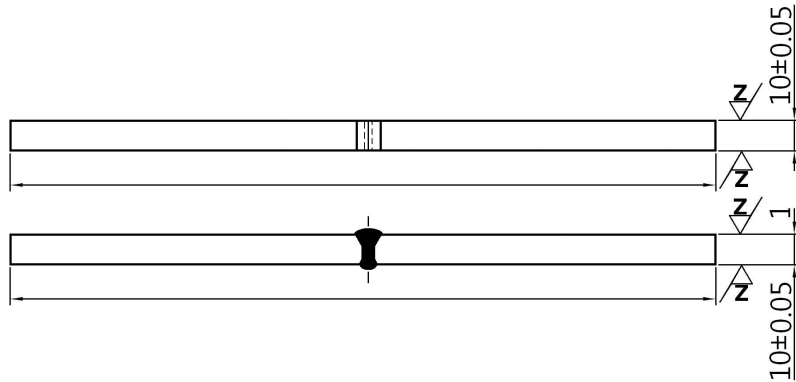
Geometry of hardness and welding structures in specimens
